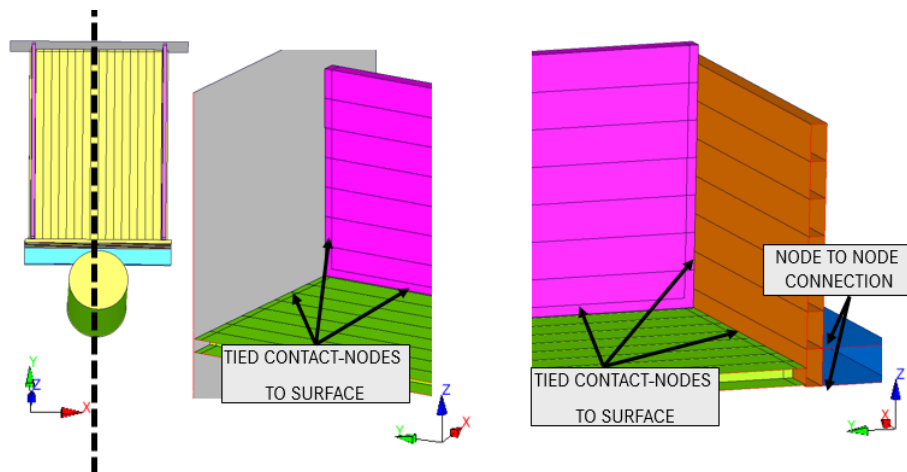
Contacts defined between wall, floor, cross member and screw frame
